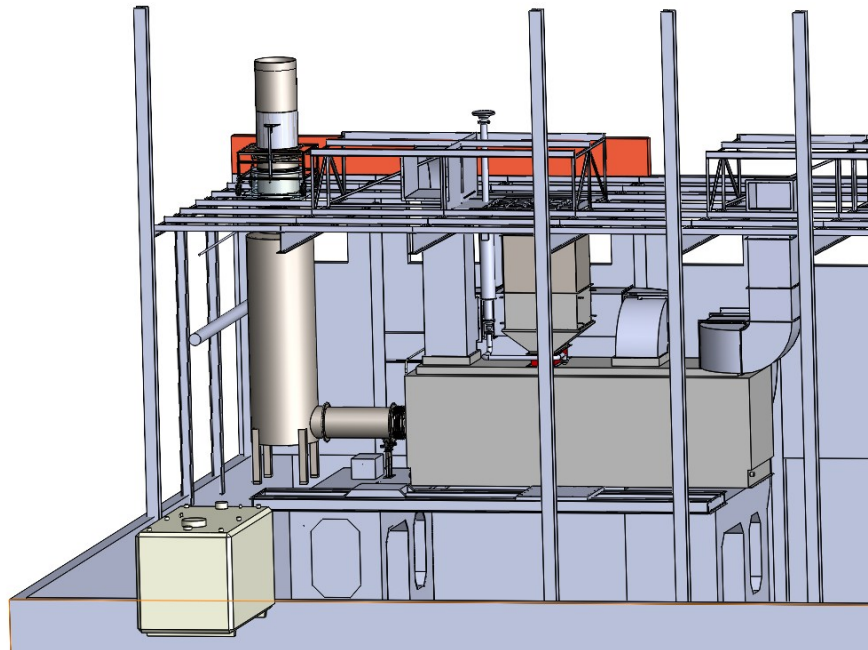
SolidWorks model of full assembly, including gas turbine package and ducting and components as well as full exhaust system.
